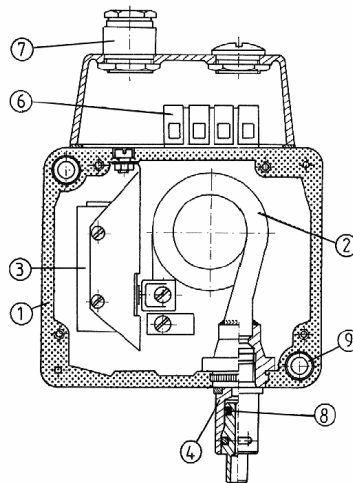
Hydro-electric pressure switch of type HED 2: 1 – housing; 2 – bourdon tube; 3 – micro-switch; 4 – quick coupling; 6 – terminal board; 8 –gasket; 9 – absorber; [2]
